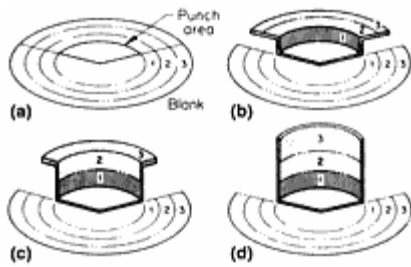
Deep drawing of a cylindrical cup. (a) Before drawing. (b) After drawing.
